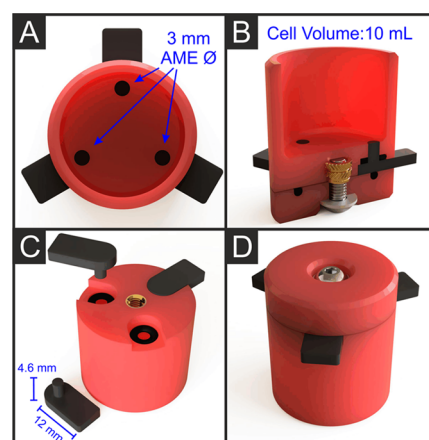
CAD Images of the cell used throughout this work, including (A) top view showing the electrode faces inside the cell, (B) isometric cut-through showing the electrode design, along with bolt, washer, and heat-set insert for sealing the cell, (C) bottom cut-through showing the O-rings and electrode insertion point, along with the heat-set insert, and (D) bottom view showing the bolt for sealing and electrode attachment points.
